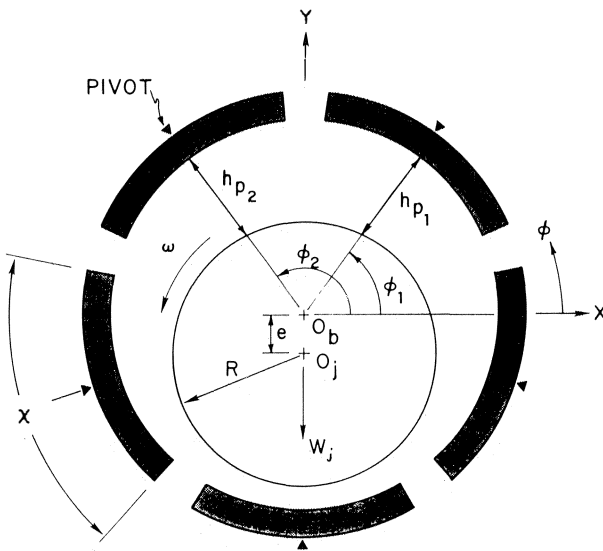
Tilting Pad Bearing Pivot Film Thickness.
